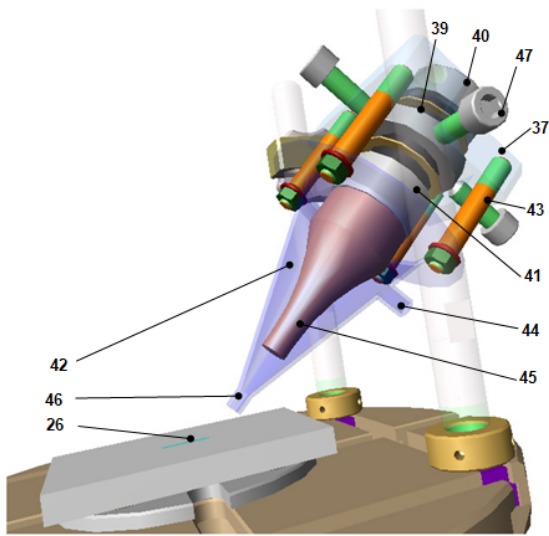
Initial constructive solution for additional ultrasonic flushing device (view 2)
